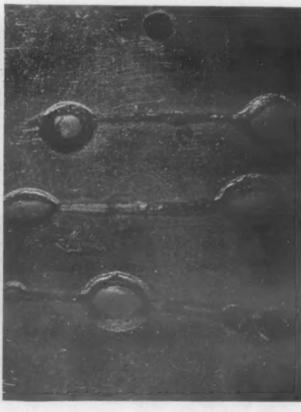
Spread of solder on brass panels electroplated with cadmium.
